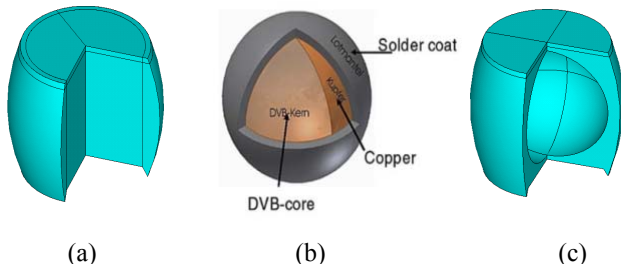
Three solder ball structures a) a regular solder ball; b) a polymer-cored solder ball; and c) a hollowed solder ball
